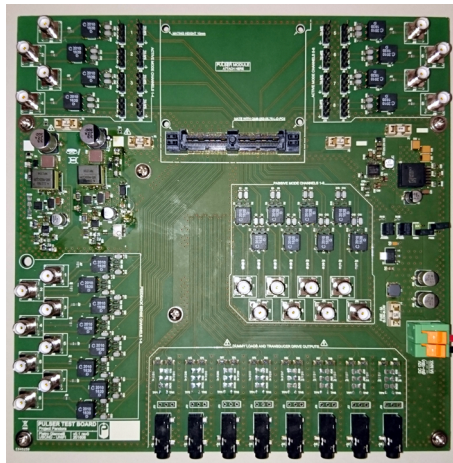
Picture of the ultrasound driver module analog test board. Board size is 180×180 mm.
